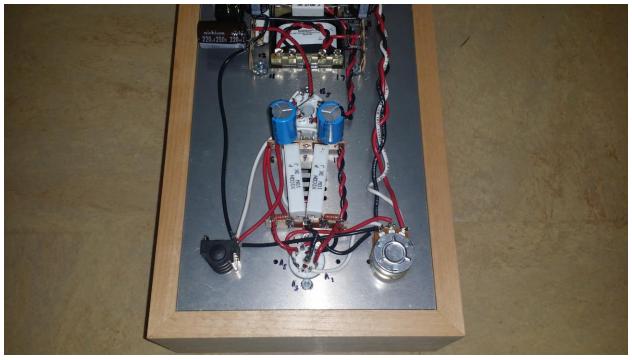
Faceplate Bottom Wiring; Bottom Half View.
